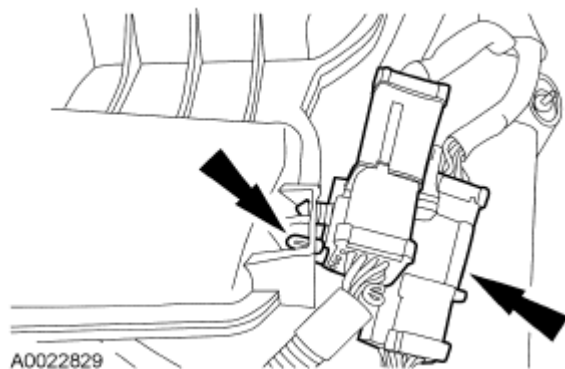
Locating Engine Control Sensor Wiring Connectors
